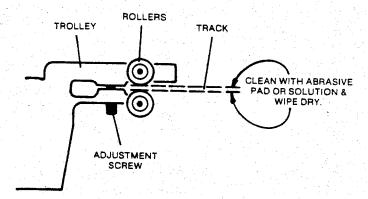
TROLLEY ROLLER ADJUSTMENT
